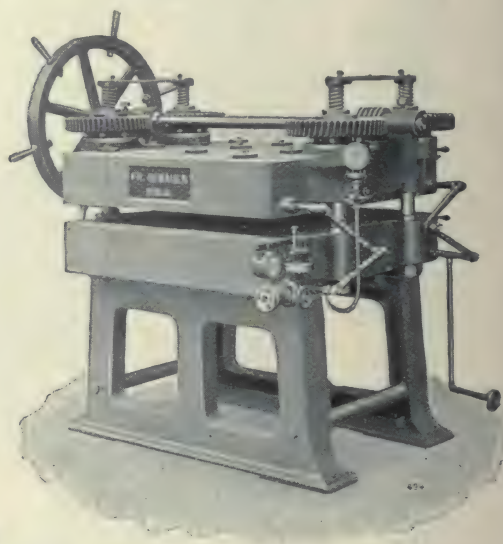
Hand power vulcanising press. Plates, 1250 by 1250 millimetres (say 50 by 50 inches).
